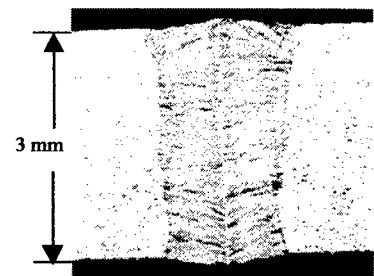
deep penetration welding with diode laser [15]; 2.5 kW, $f = 50$ mm, $v = 0.7$ m/min, (ROFIN DL025S)
